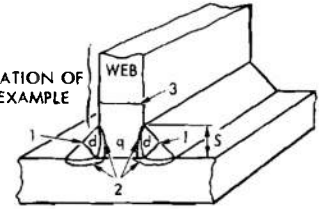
Three Possible Areas of Failure in a Double Fillet Weld
